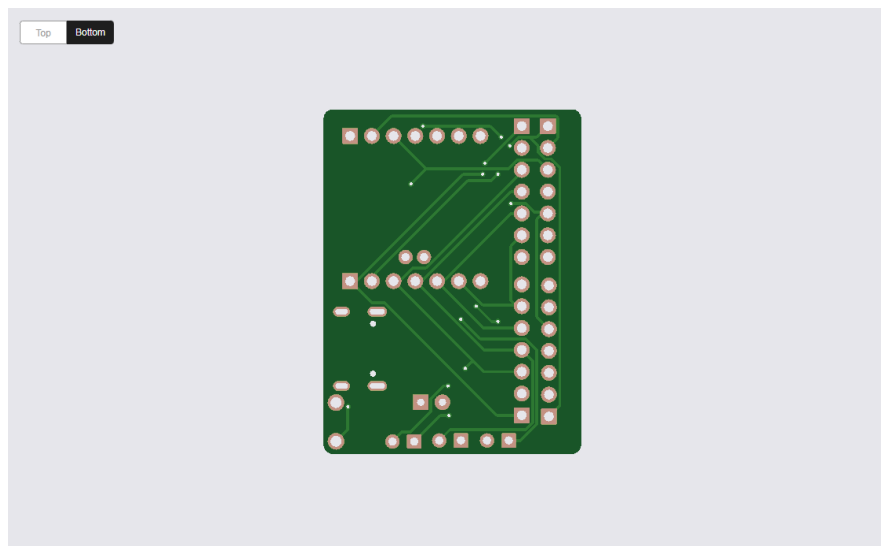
Bottom view of PCB received by JLCPCB
